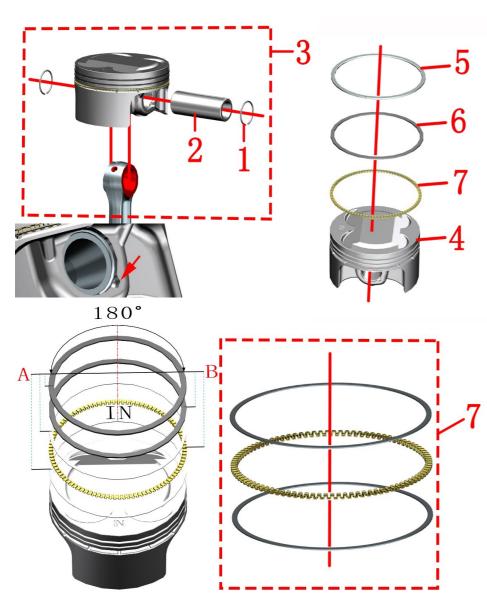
CYLINDER BLOCK		Disassemble the piston	CHK
